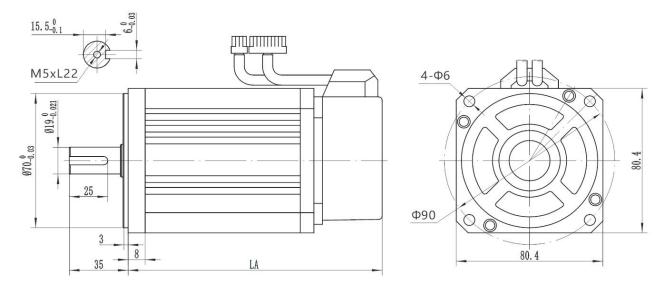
Installation dimension drawing of WE series 80 flange servo motor
